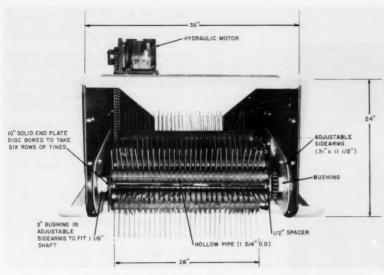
Front view of head showing details of drums and the steel rake teeth.
